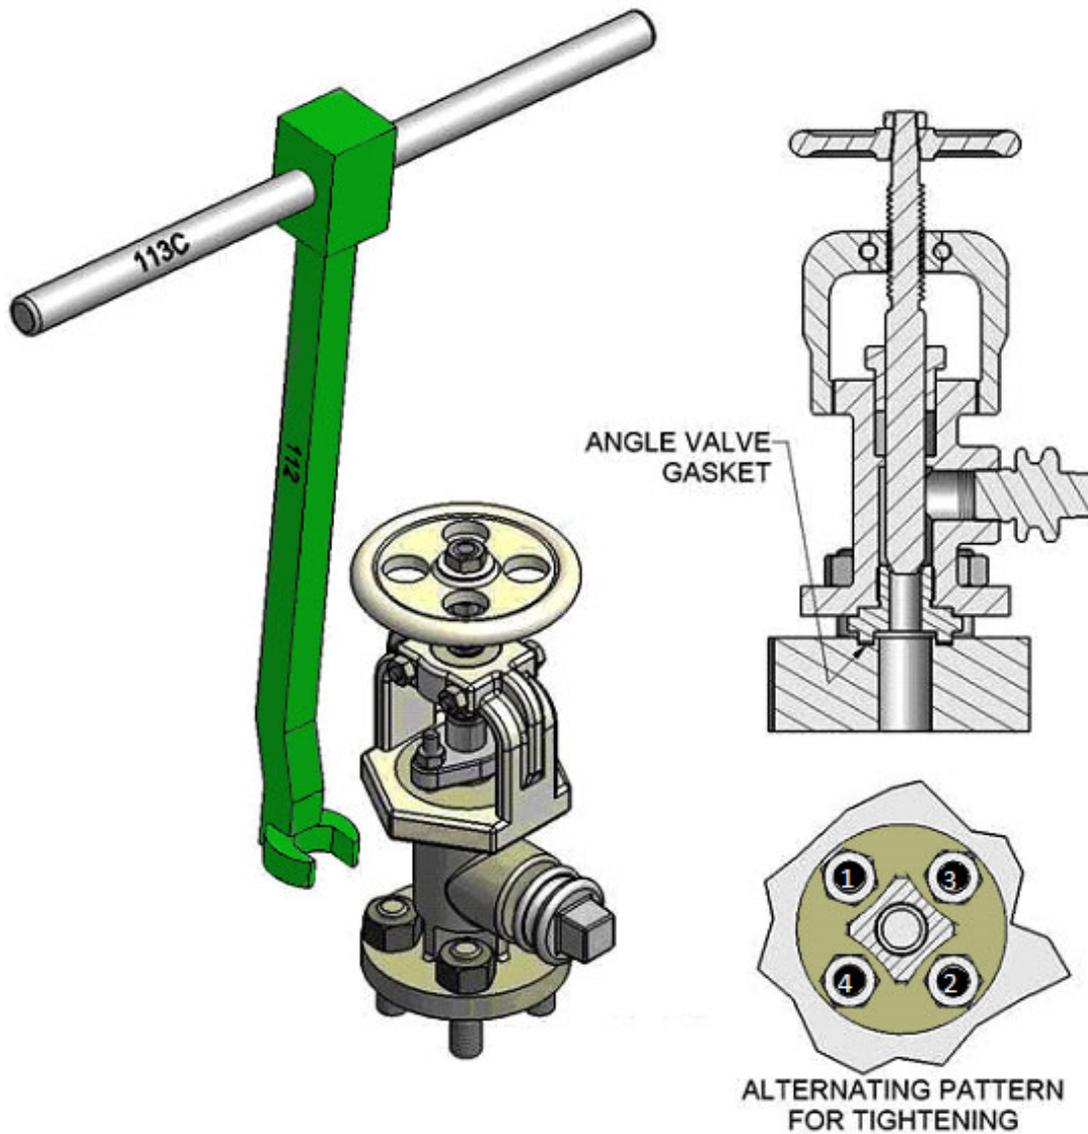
Angle Valve Gasket Leaks and Required Tools
